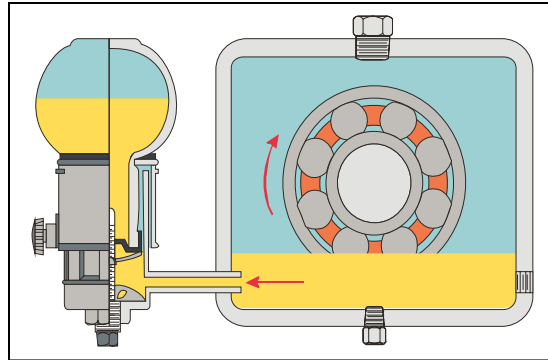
Correct Mounting of Oiler Relative to Shaft Rotation
